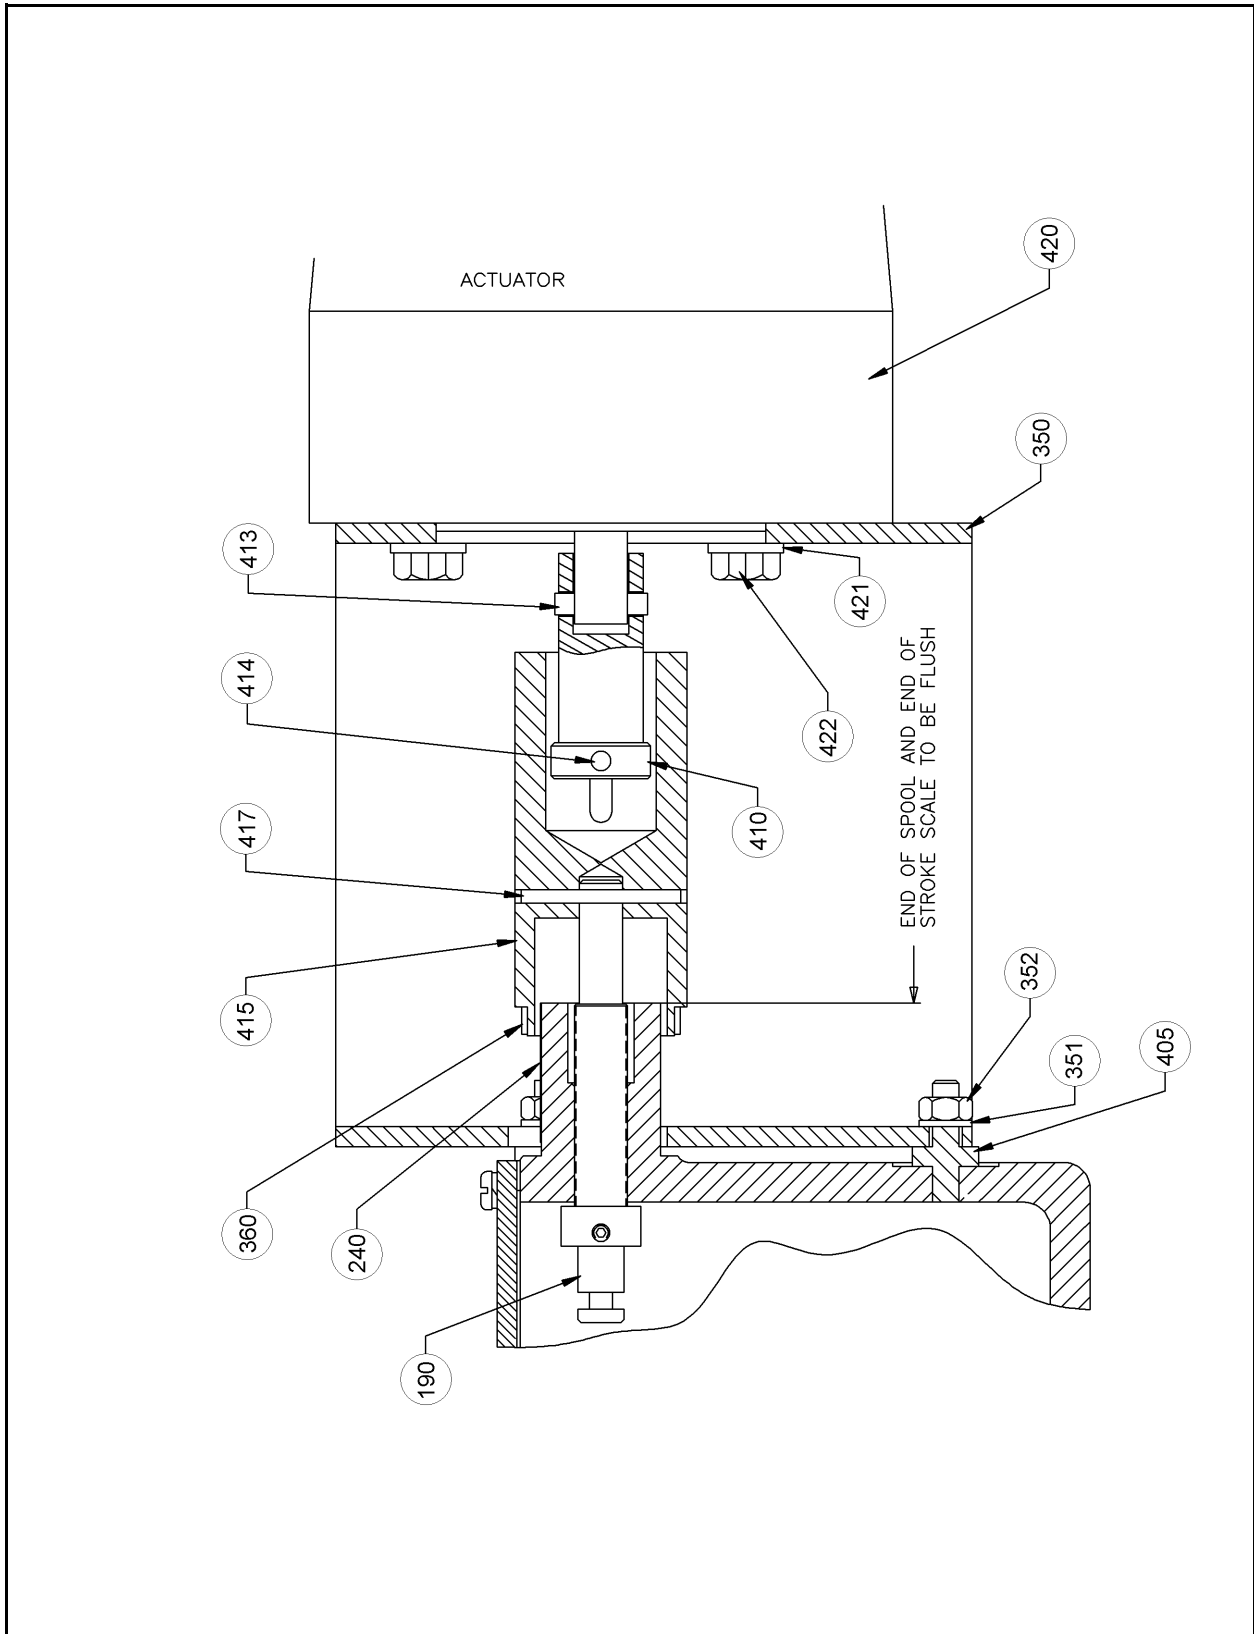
Milroyal D ECC Mounting Adapter (DWG. 1022906000).
